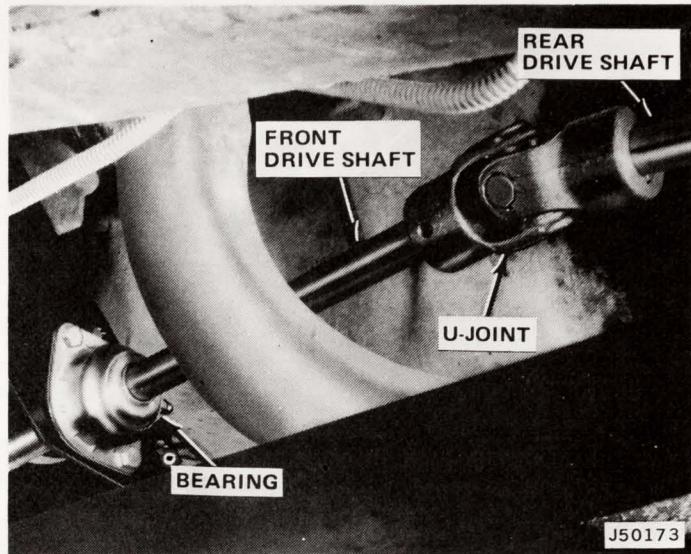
Bearing and Shaft Installed—Cherokee V-8 Engine
